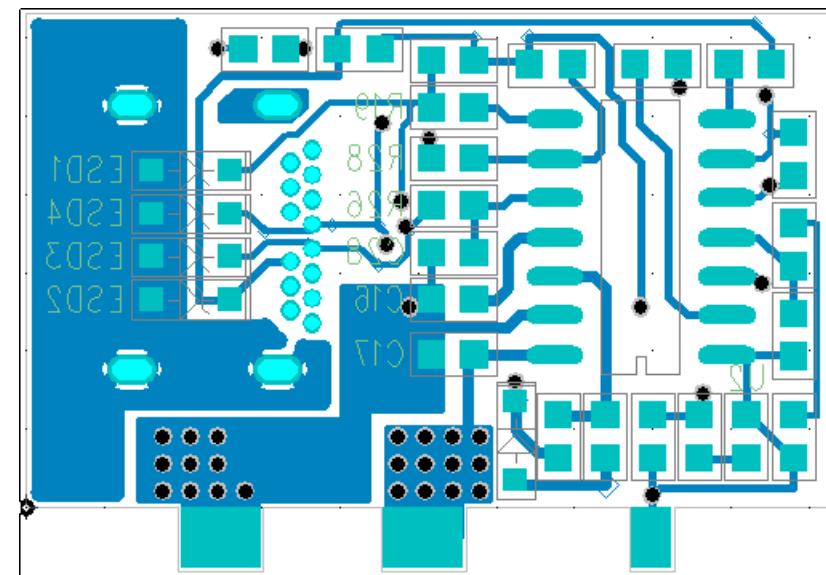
, Bottom View of PD control board (WT6632F)'s PCB
